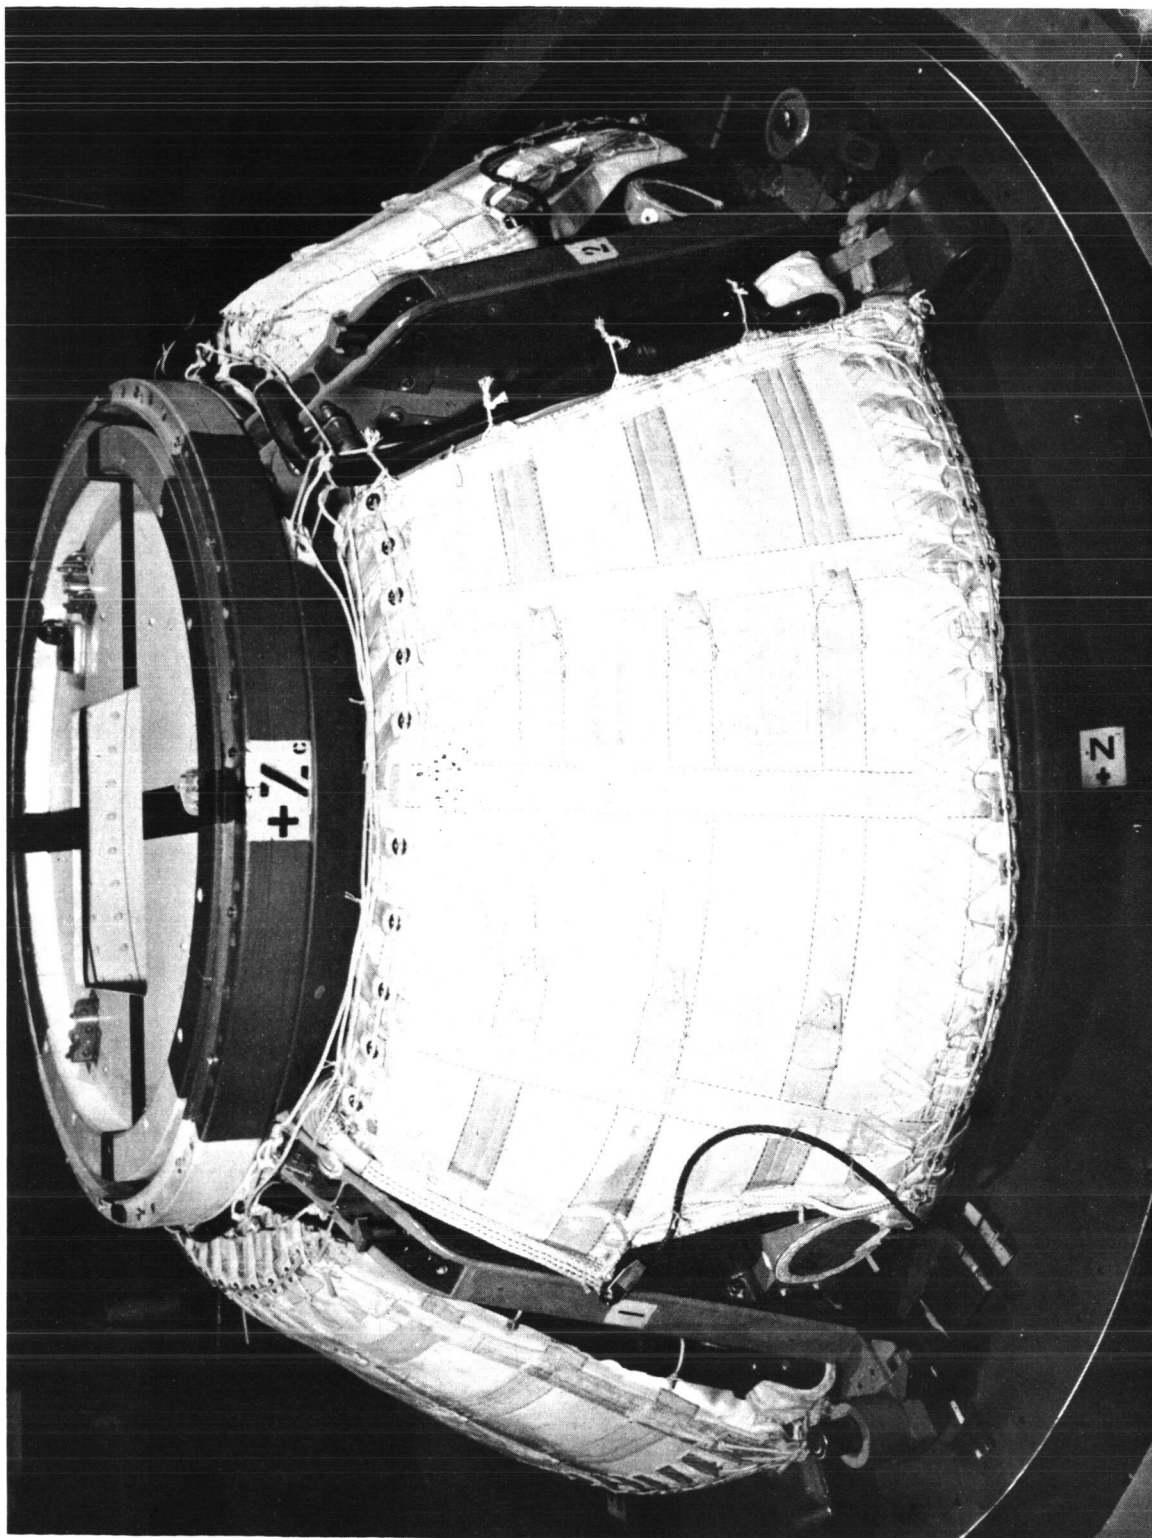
Parachute Subsystem Installation, +Z Bay
